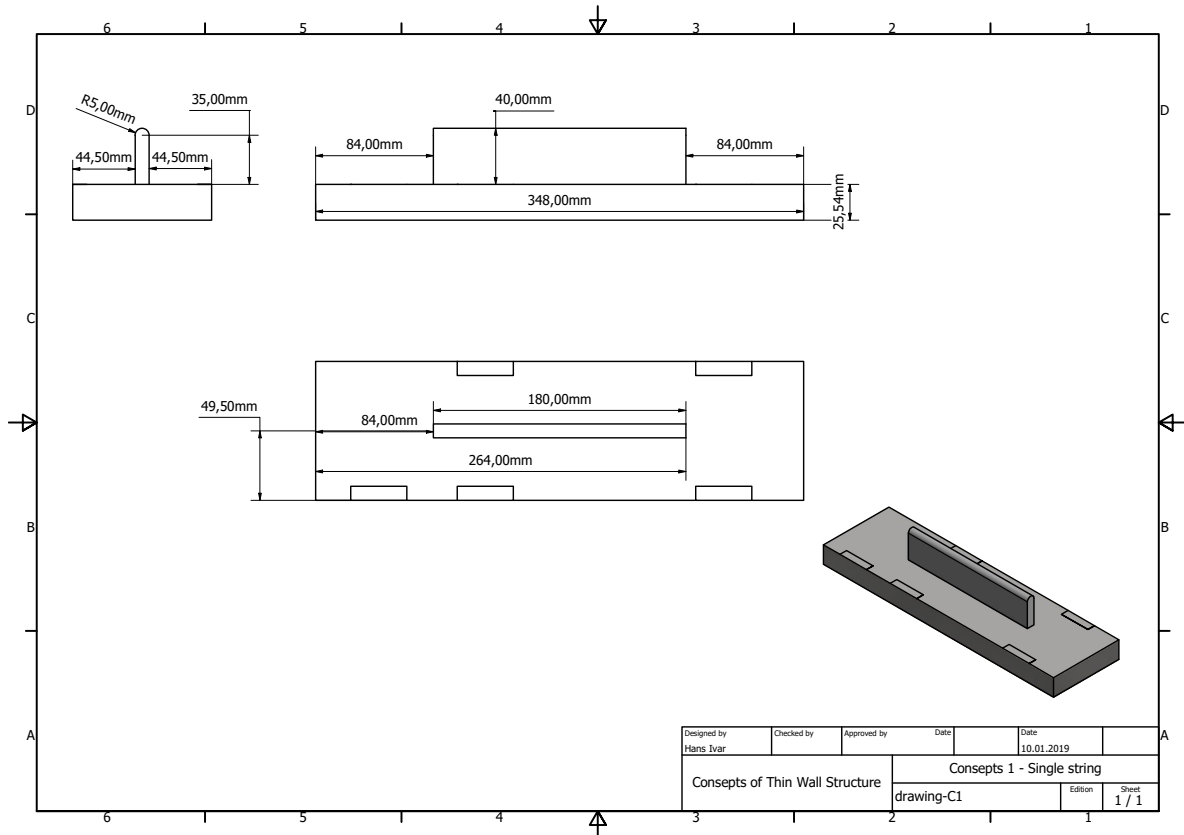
Schematic view of welding path plan of sample P1D1, the rectangle lines on the sides illustrate the location of the clamps to fix the BP. All schematic view of welding plan can be found in attachment 178
